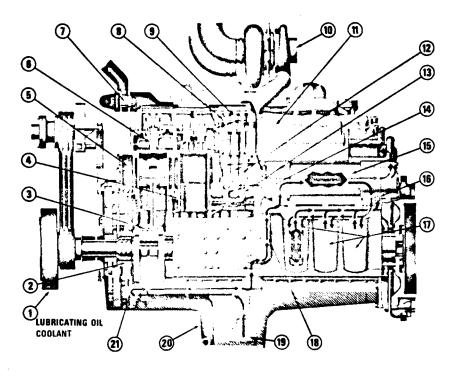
, (CWC-13). Lubricating oil and coolant flow - V-1710 Engine
